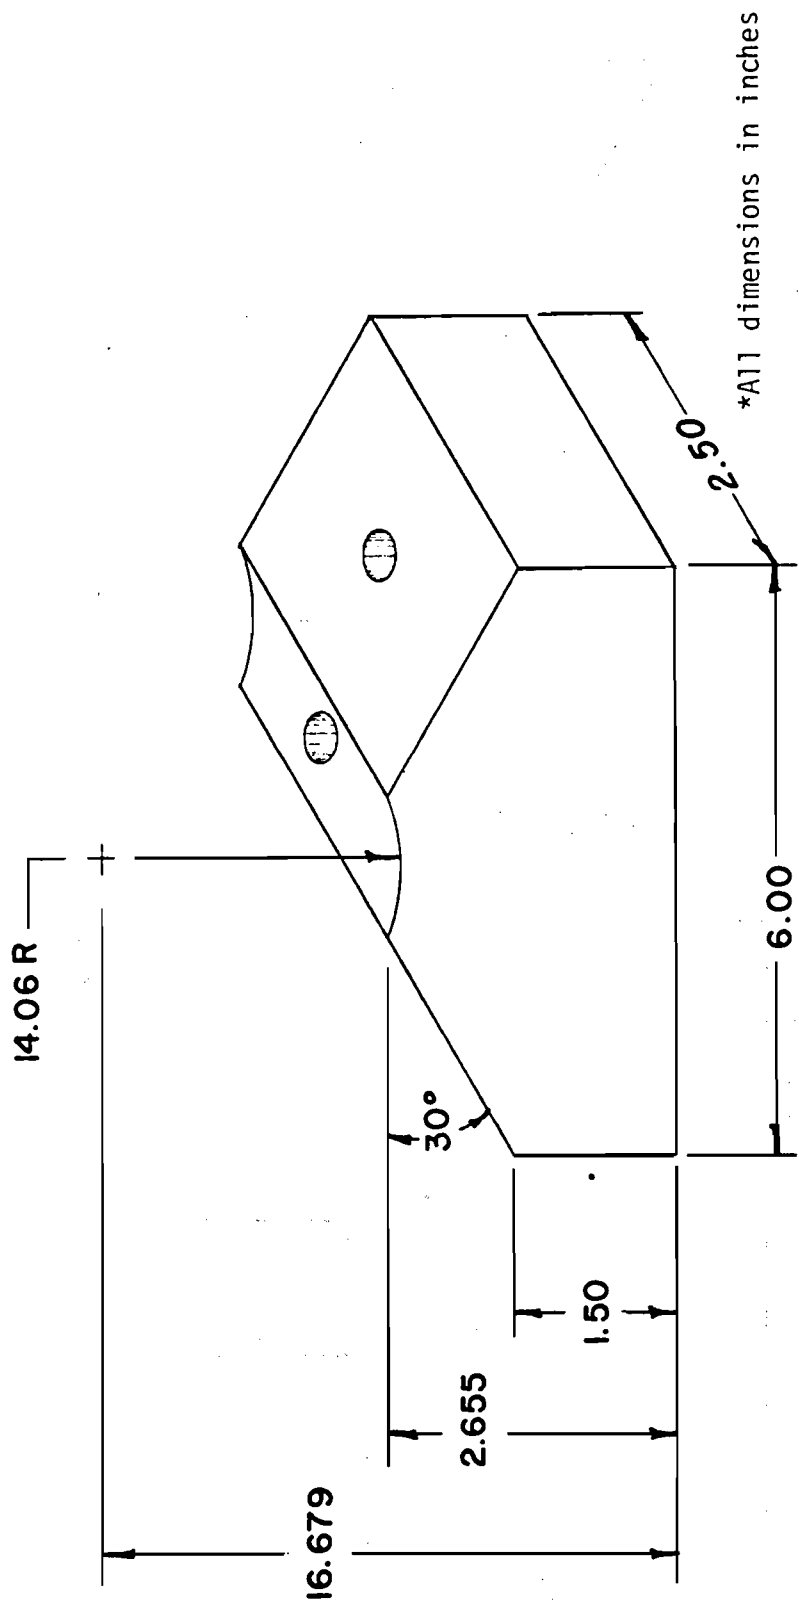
(c) Pole piece #3 EMAT mounts on the top surface.
